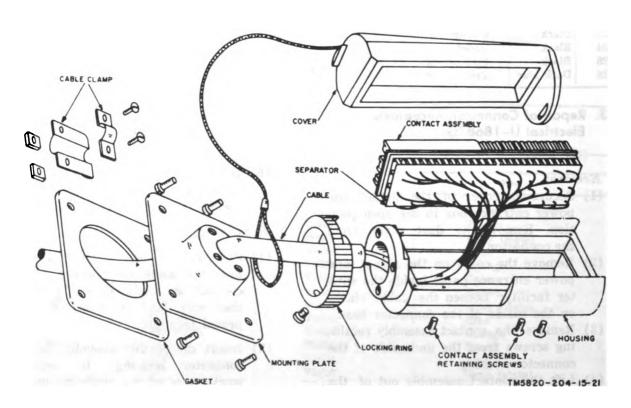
Connector, Receptacle, Electrical U-186B/G, exploded view.
